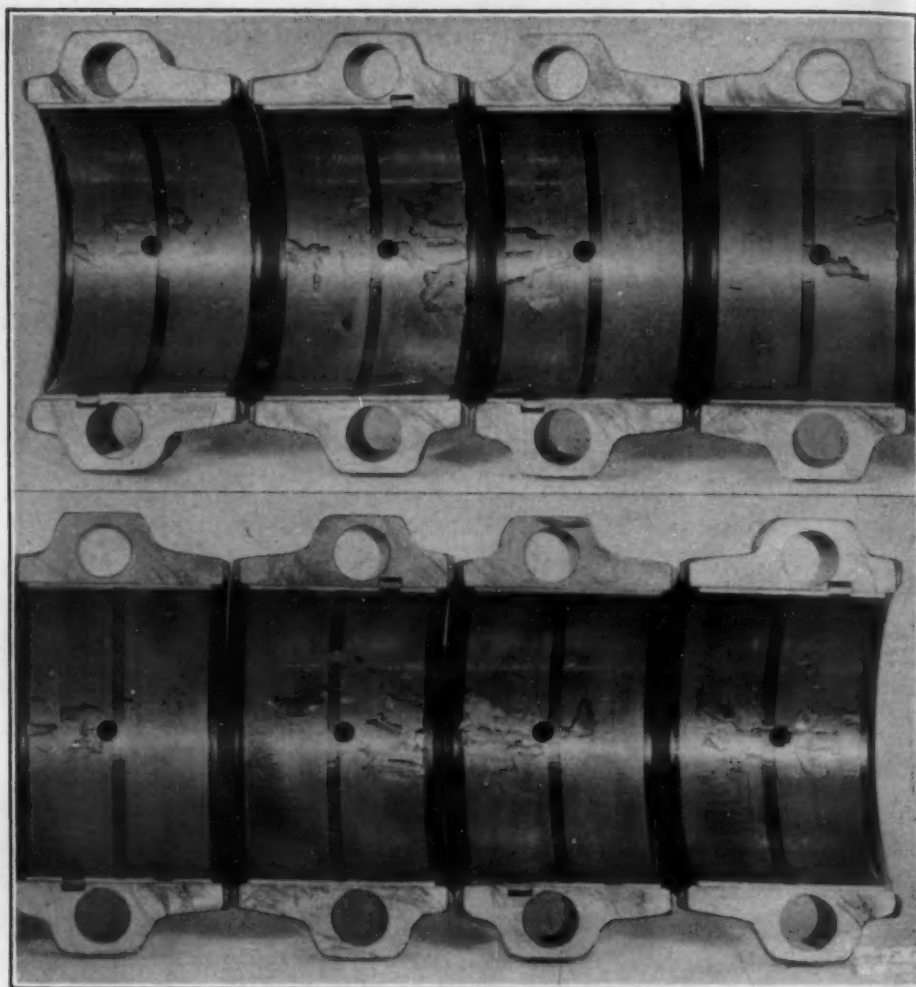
Photograph Illustrating a Typical Fatigue Failure of Babbitt Bearings Run in an Automobile Engine.
